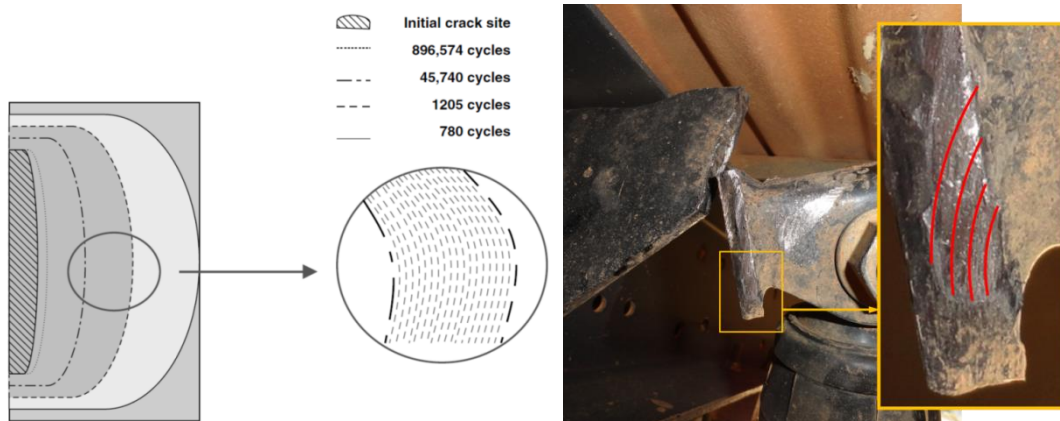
Fracture surface beach marks at the seam weld root of the failed part
